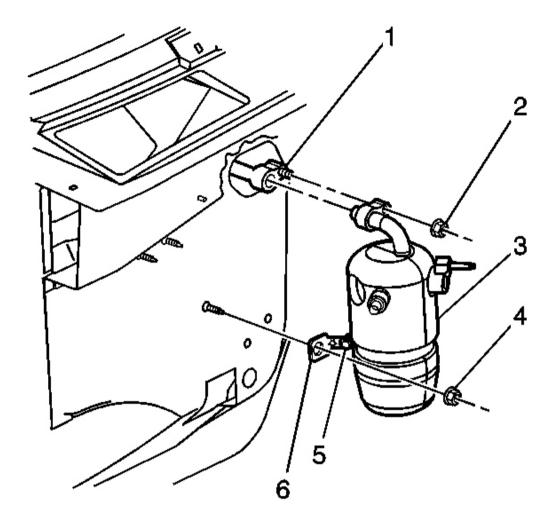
Retaining Bracket & Accumulator Courtesy of GENERAL MOTORS CORP.
